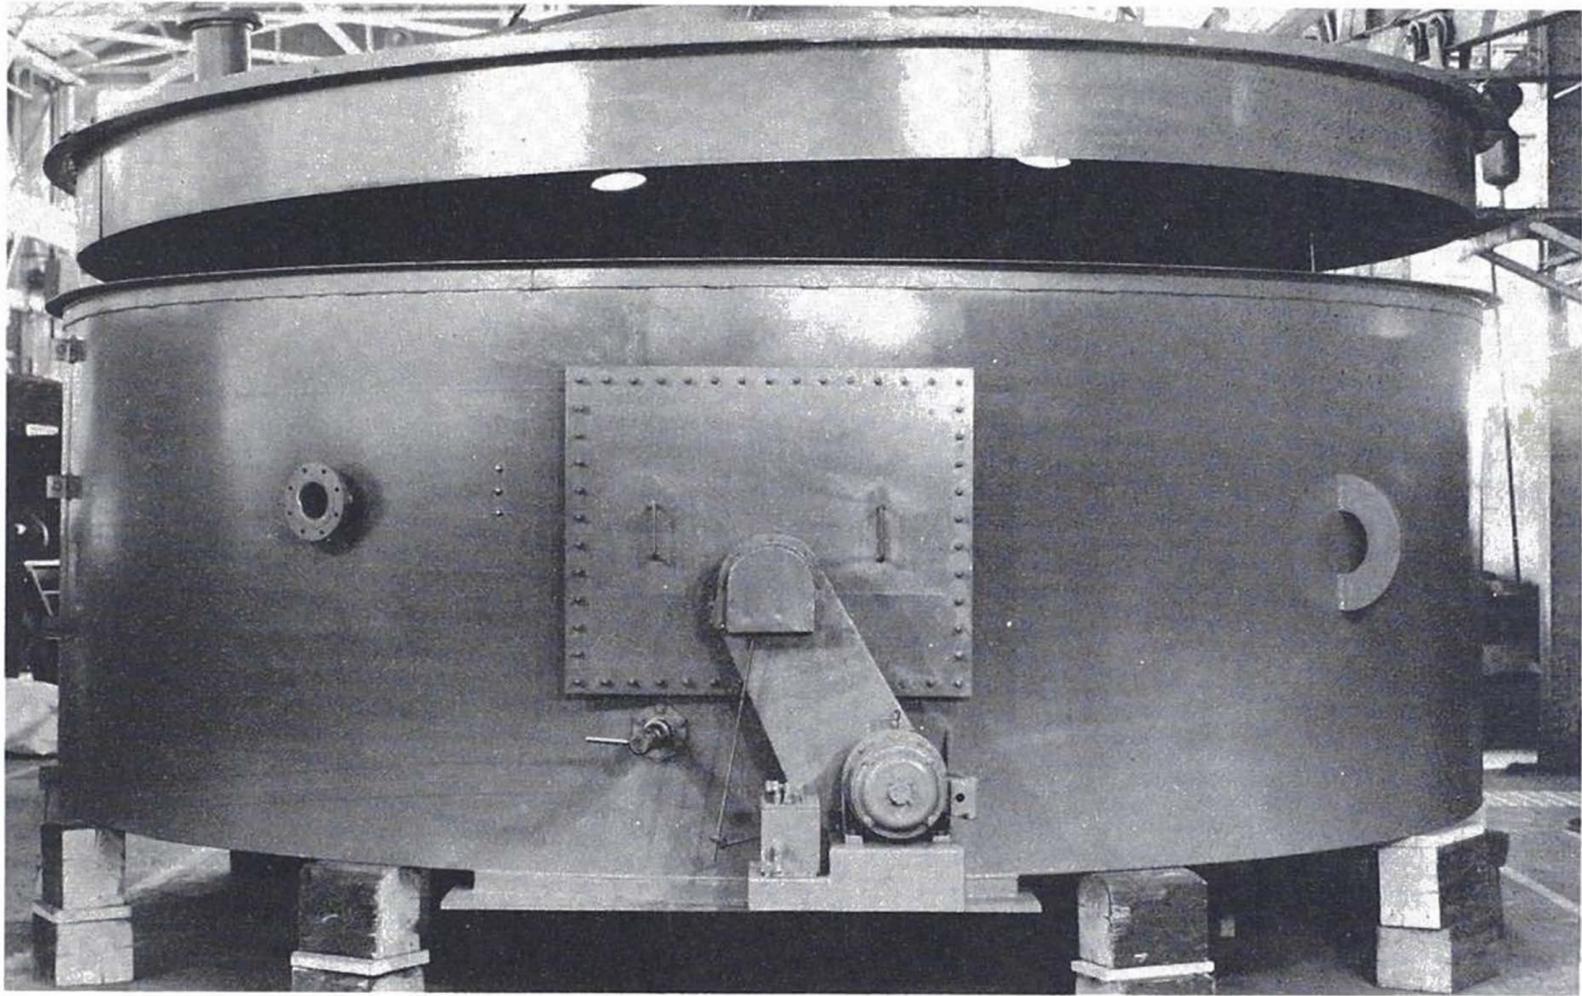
Wurster & Sanger Continuous, Horizontal, Rotary Vacuum Filter for separation of miscella and extracted meal, shown during shop assembly. Note accessible drive on side of vessel and deep seal extension on cover.
